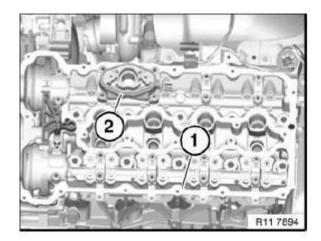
Identifying Cylinder Head Cover Sealing Surface And Seal Courtesy of BMW OF NORTH AMERICA, INC.
